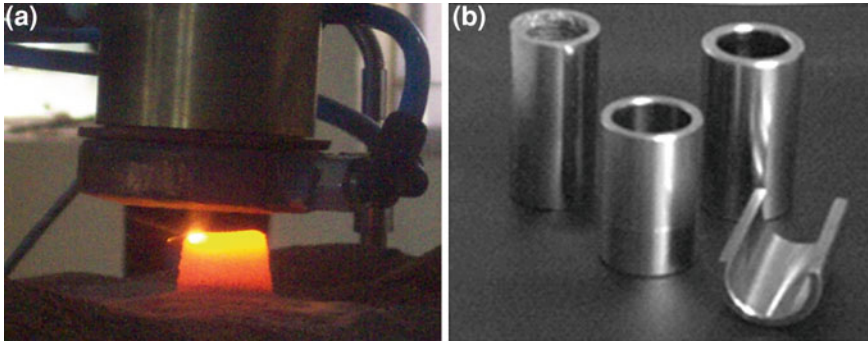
a Laser Rapid Manufacturing of Colmonoy-6 bush, and b bushes after final machining
